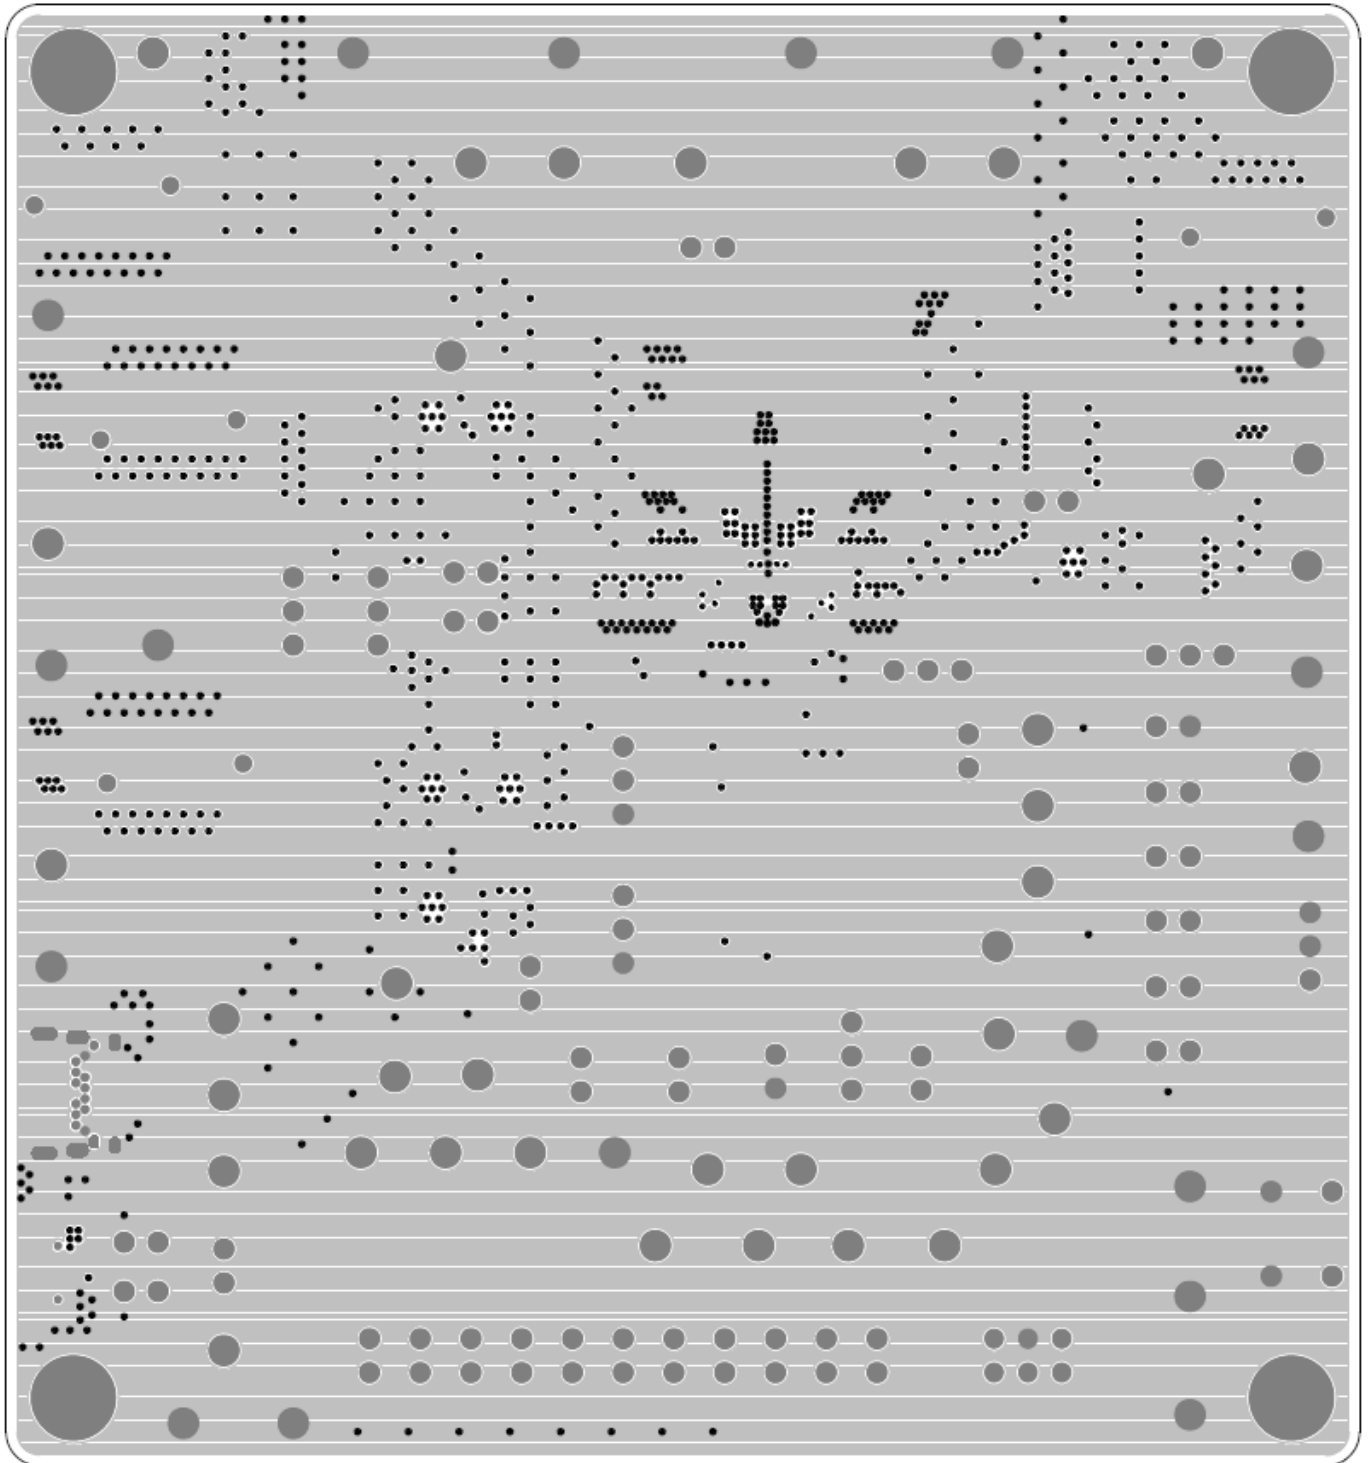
PCB Layout—Inner Side (2<sup>nd</sup> Layer)
